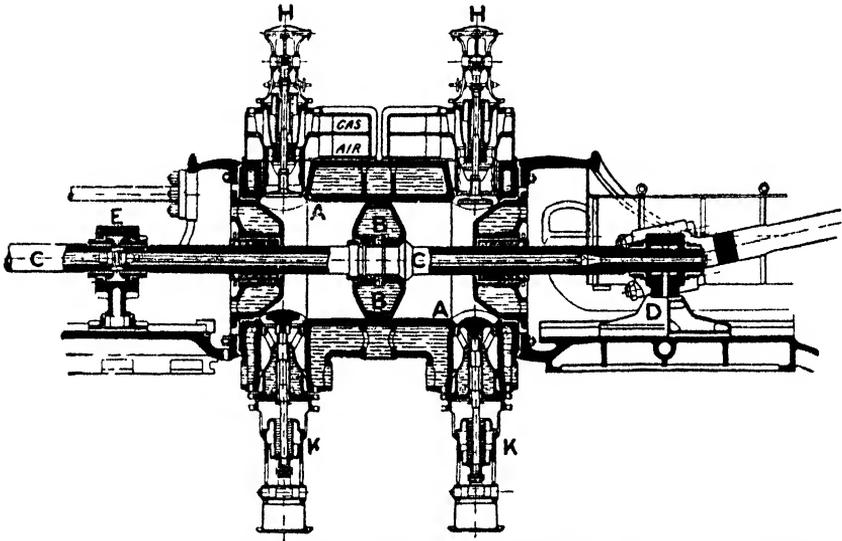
Section through one Cylinder of Four-stroke Double-acting Tandem Engine (Continental Pattern)
